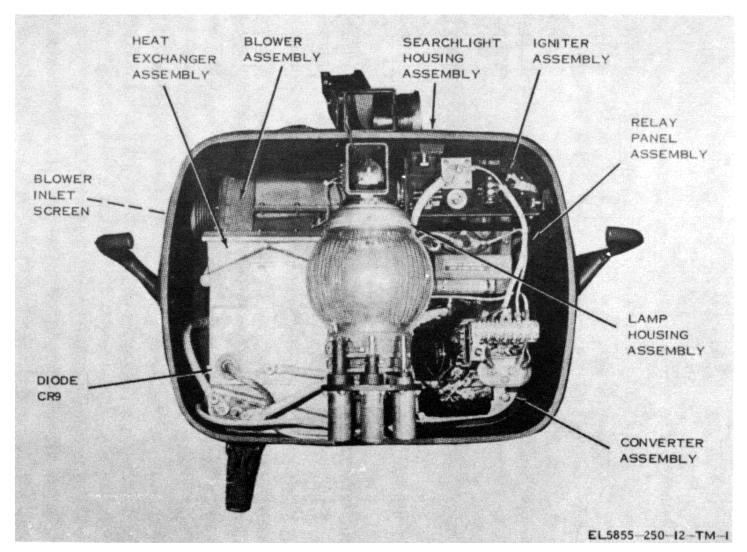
Searchlight, subassembly (cowling assembly, primary reflector, xenon lamp, and upper elbow, removed).
